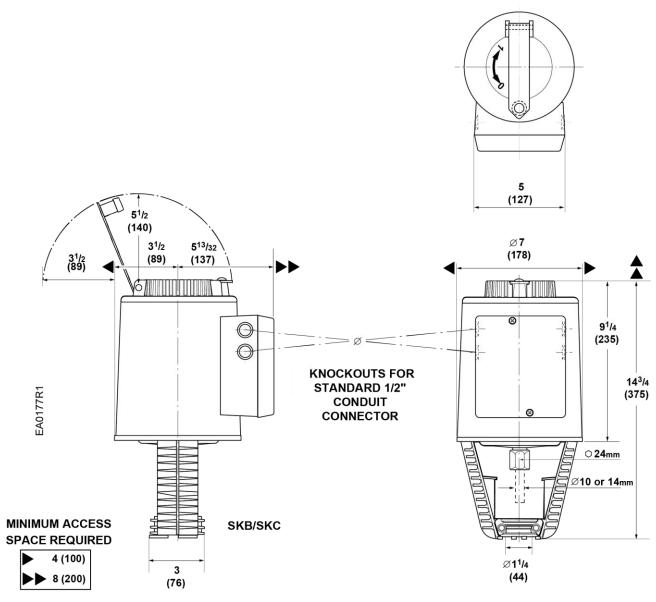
Dimensions of SKB/C in Inches (Millimeters).
